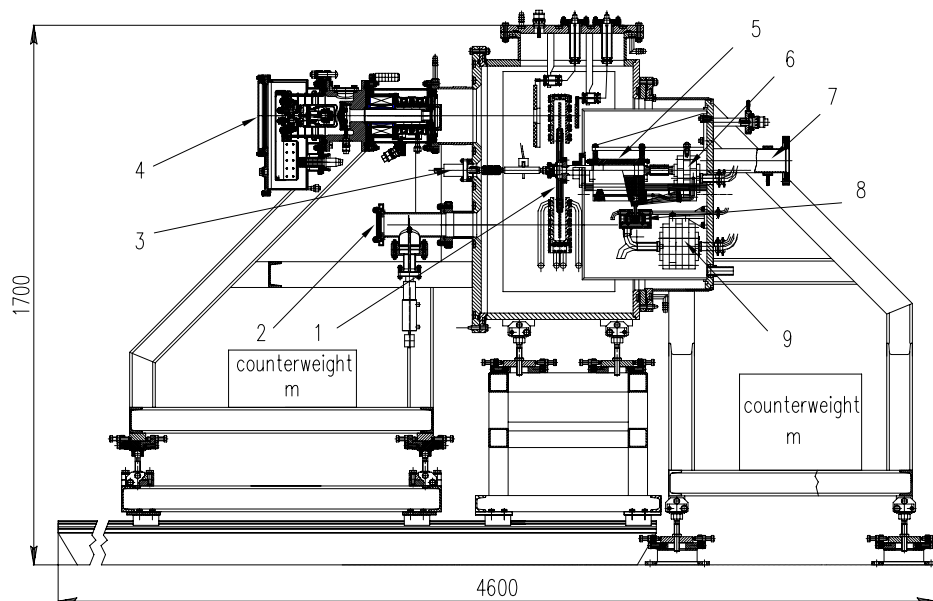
Test facility in assembly. 1 - rotating target, 2 – windows assembly, 3 – rotation feedthrough, 4 – electron gun, 5 – suspension assembly, 6 – LM motor, 7 – pumping port, 8 – float valve, 9 – motor/pump LM couple.
